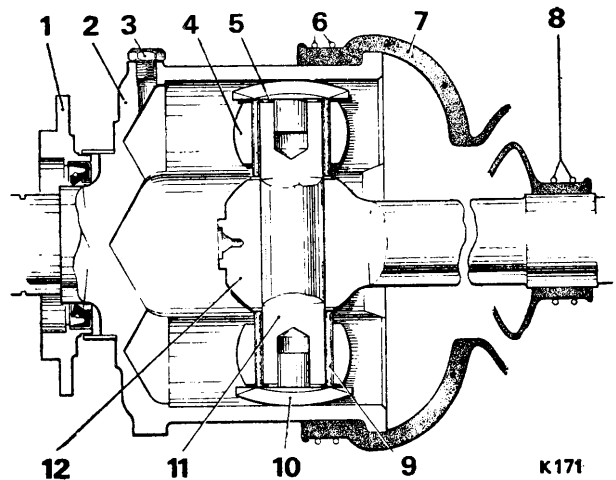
HALF-SHAFT BALL AND TRUNNION JOINT
